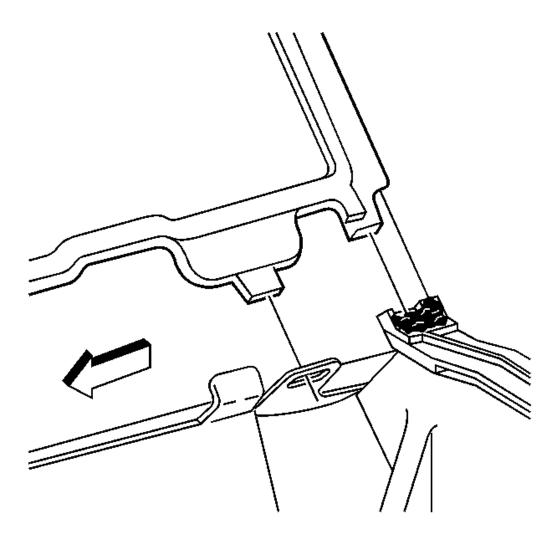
View Of Intake Manifold Side Gaskets Courtesy of GENERAL MOTORS CORP.
